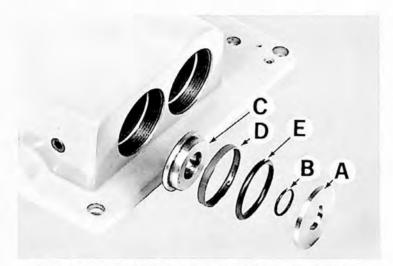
Piston Rings and Seals for Roller Clamp Piston
